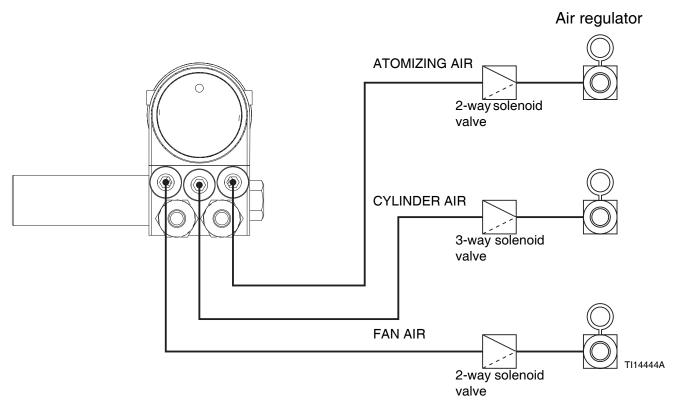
Remote Air Regulation using Solenoid (Guns with Manifold)
